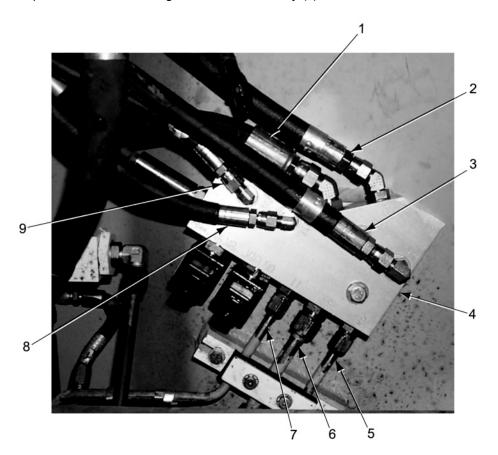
Installation and Interconnection of New Forward Right Manifold Assembly
